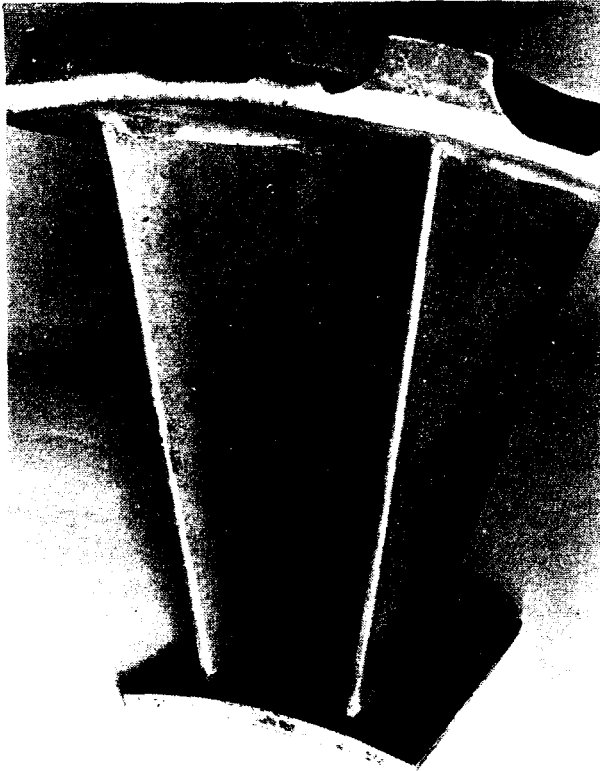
TYNE INLET GUIDE VANE: CRACKING
